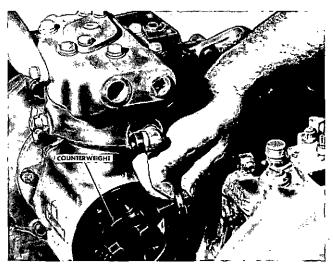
Removing air compressor counterweight capscrew V8-350/VT8-430
